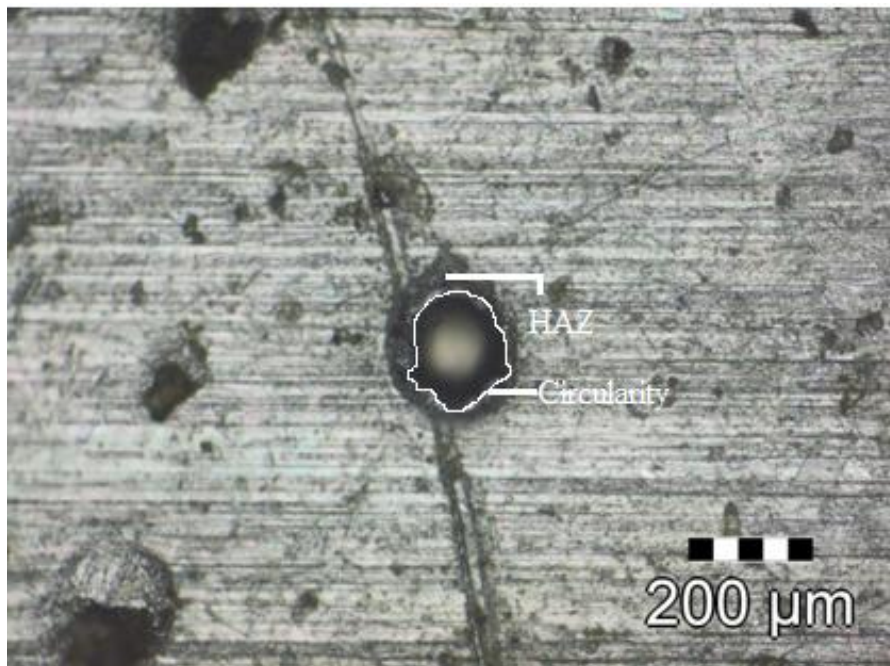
Microscopic view of laser drilled hole at top surface
